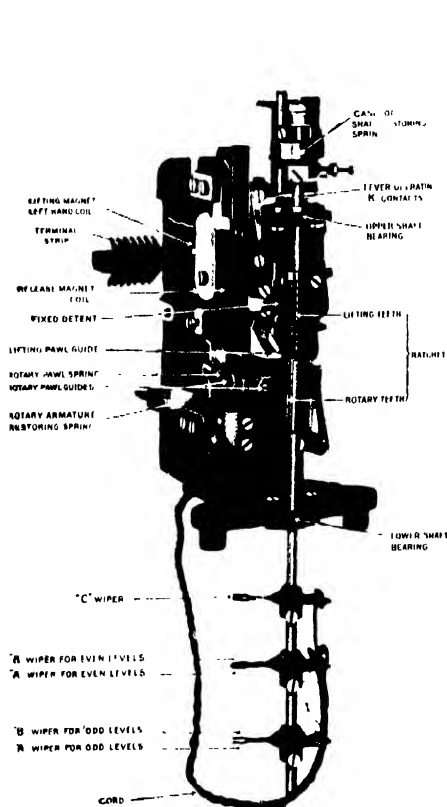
SIEMENS CONNECTOR SWITCH WITHOUT BANK AND CRADLE.
